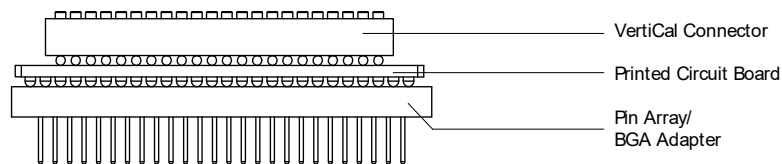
VertiCal Base Board (fitted with Pin Array/ BGA Adapter, Side View)
